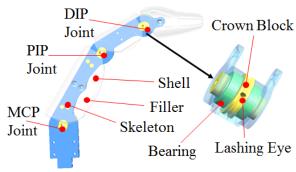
The modular design of non-thumb finger joints. Each modular finger consists of four pieces of the metal skeleton and three joints, which is covered by silica gel filler and 3D-printed shell. Each flexion-extension joint mainly consists of two miniature bearings for symmetry placement and a custom-designed bearing with lashing eye. Two cables
